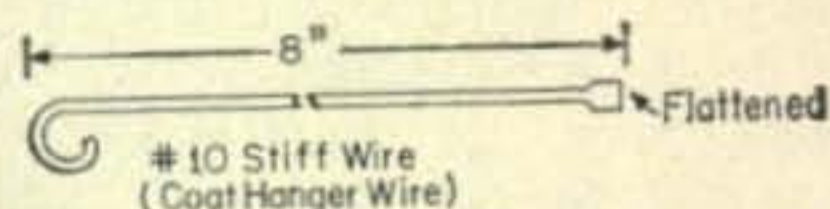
Homemade tool for adjusting final bias on the HT-37 without removing the unit from its cabinet.
